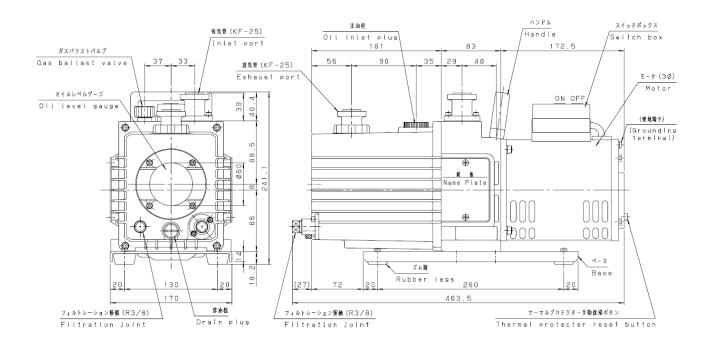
Dimensional drawing of GCD-051X oil sealed rotary vacuum pump
